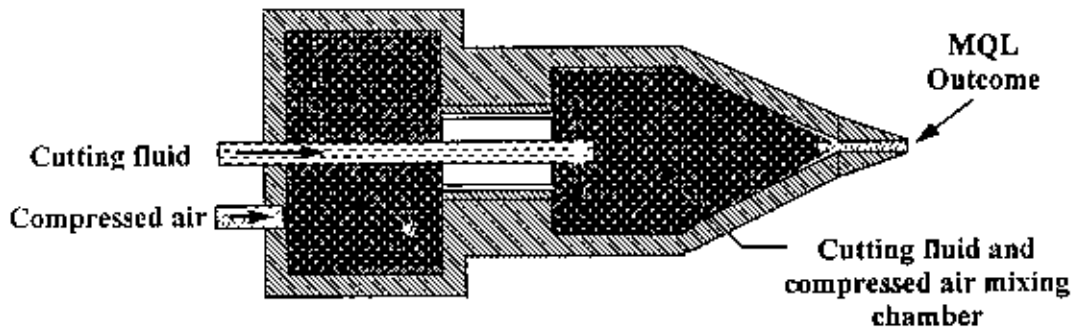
Schematic view of Mixing Chamber for MQL Supply [69]
